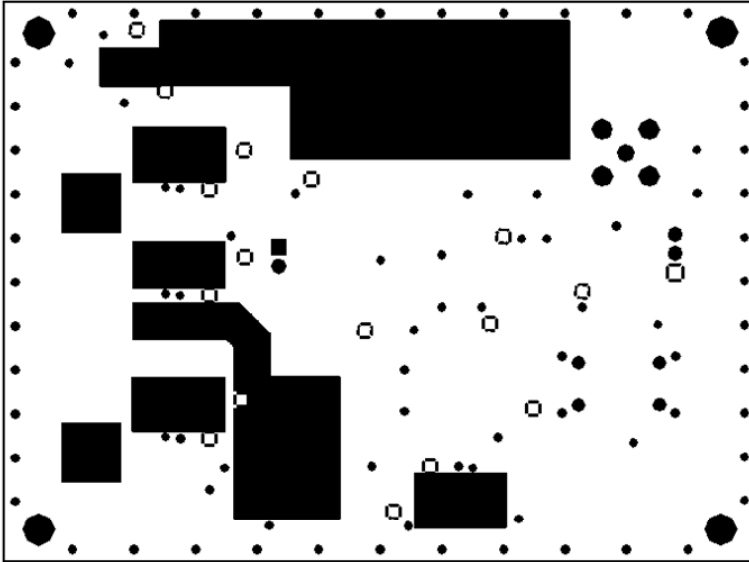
Power layer of the A-D PLL PCB designed.
